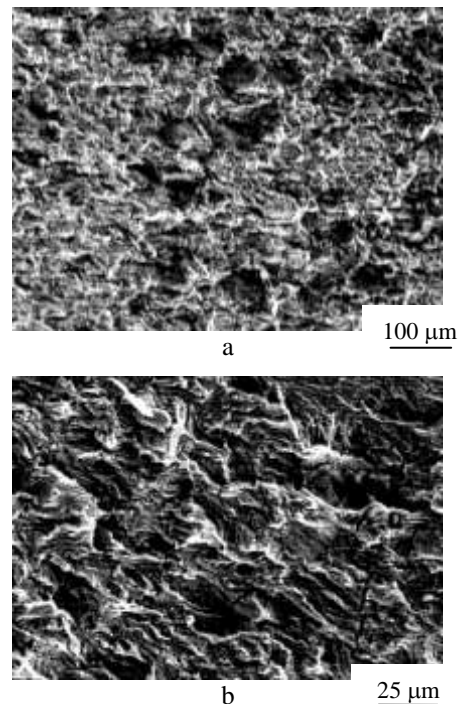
SEM views of St-2 fracture: a – zoom near “B” (Fig. 9, b); b – enlarged
